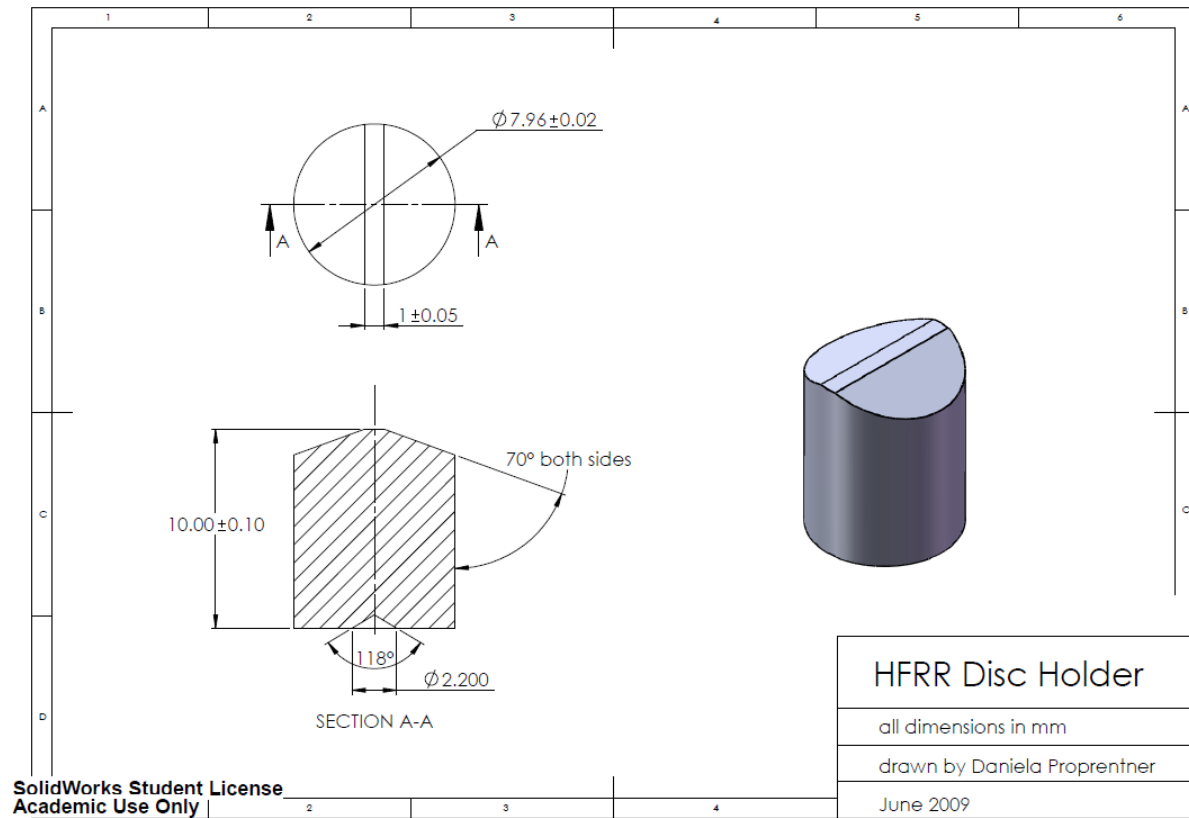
Technical drawings of friction specimens for 1 mm^2 rig.
